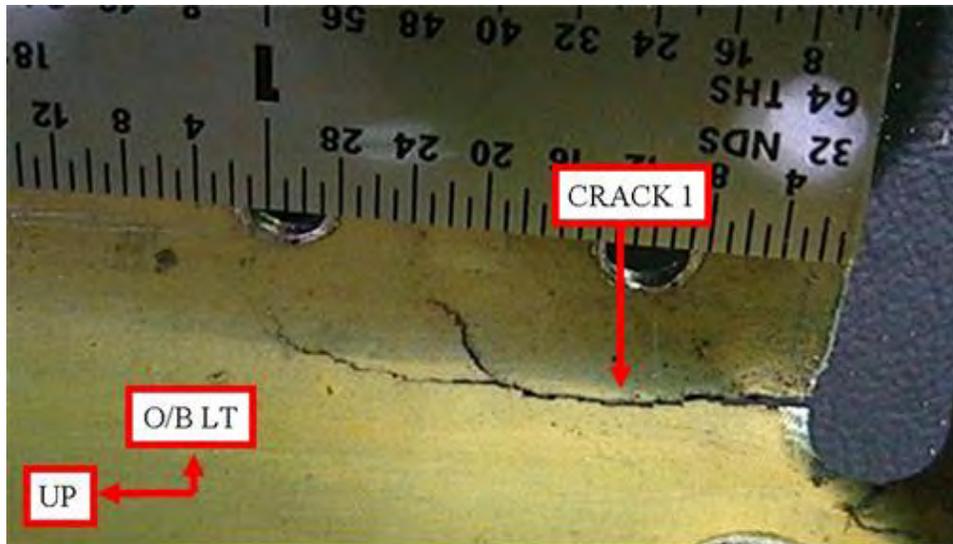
Macroscopic View of Wear on the Left Front Spar Attachment 2 of 3 (B) FS 104.31
